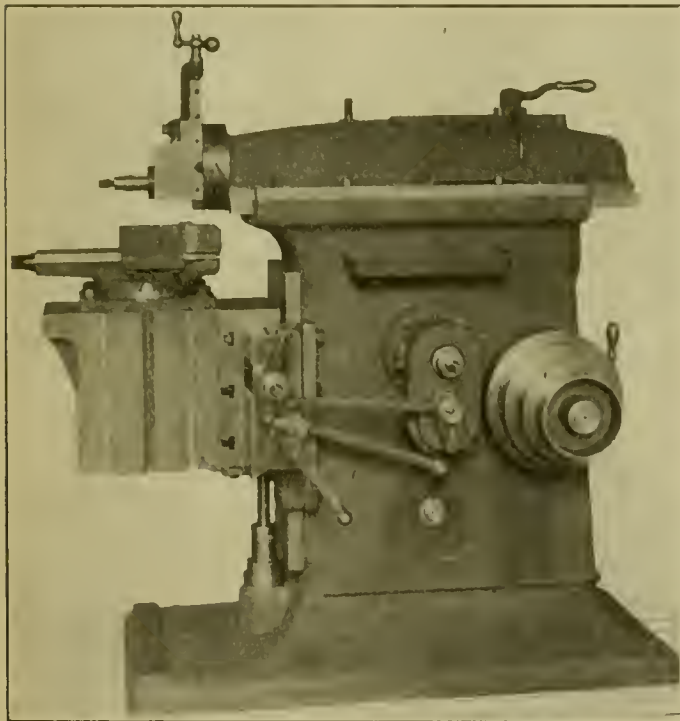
16-IN. CRANK SHAPER.—QUEEN CITY MACHINE TOOL COMPANY.
